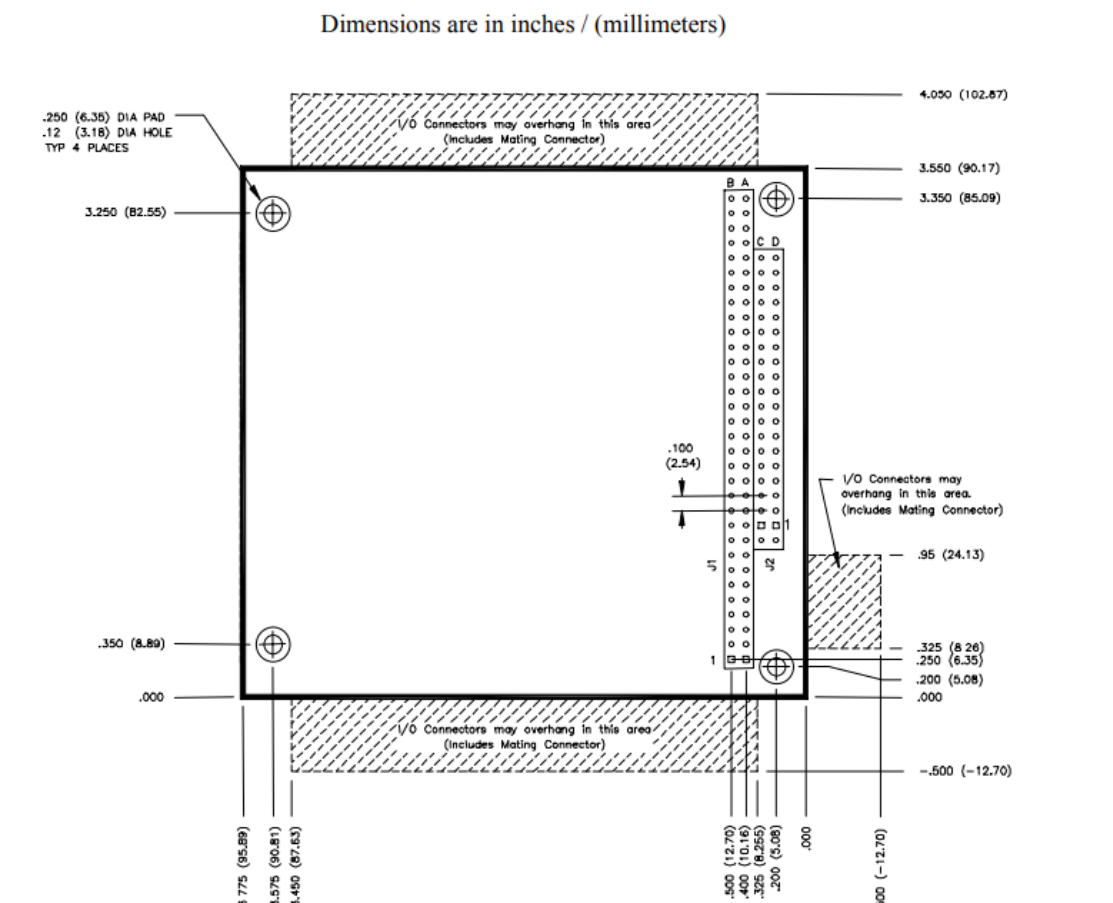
Mechanical Dimensions of the PC/104 [43]
